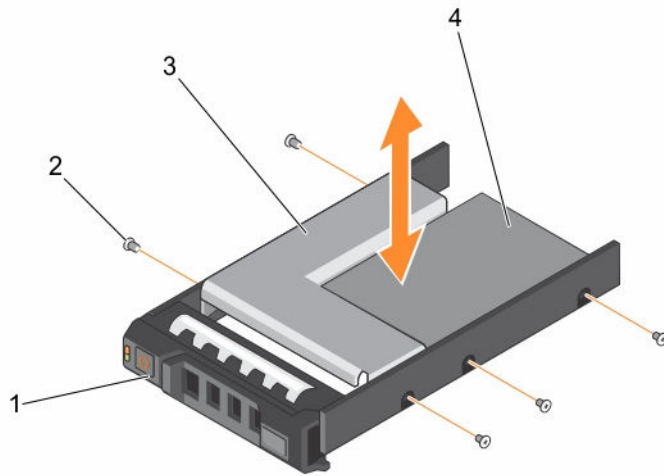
Removing and installing a hard-drive adapter into a 3.5 inch hard-drive carrier
